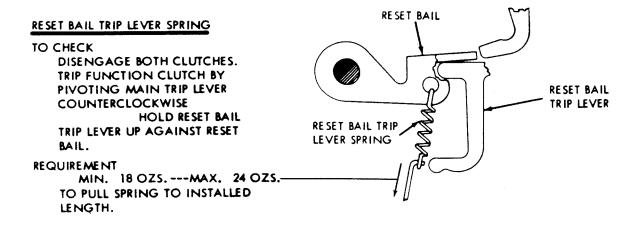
L. TYPING REPERFORATOR TT-375/UG, REMOTE CONTROL NON-INTERFERING BLANK TAPE FEED-OUT MECHANISM
